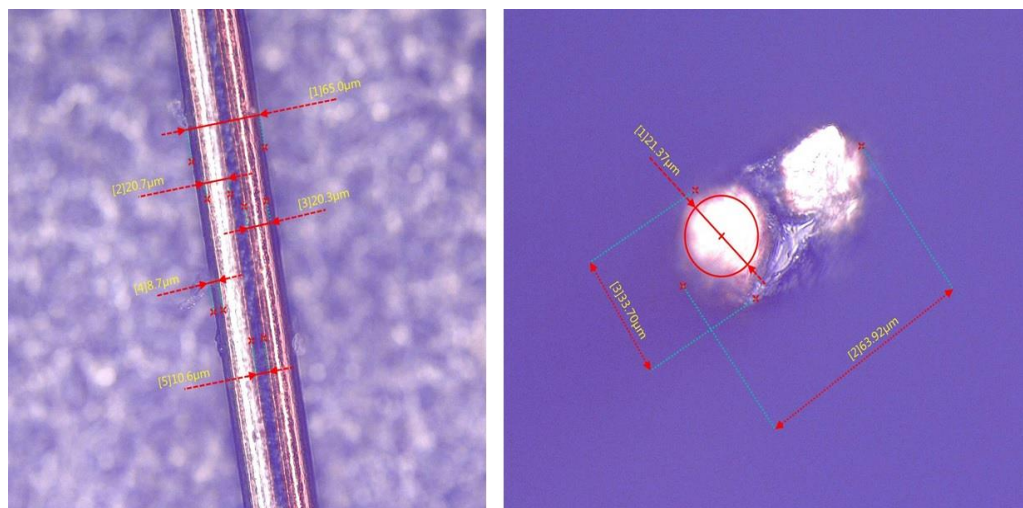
Design D. Bifilar wire. Left: Viewed with wide edge flat. Right: Viewed end-on.
